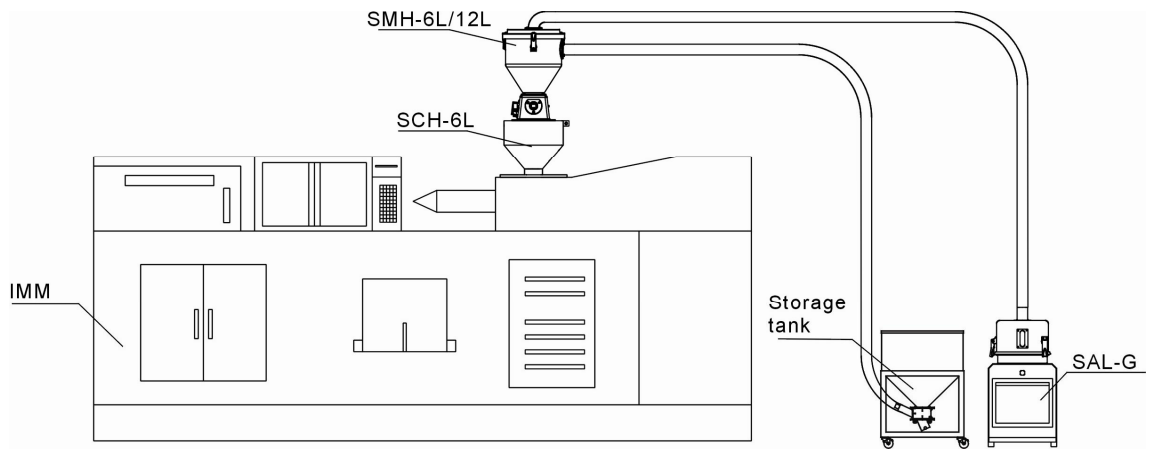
Installation layout 3 (SAL-900G/900G2)
